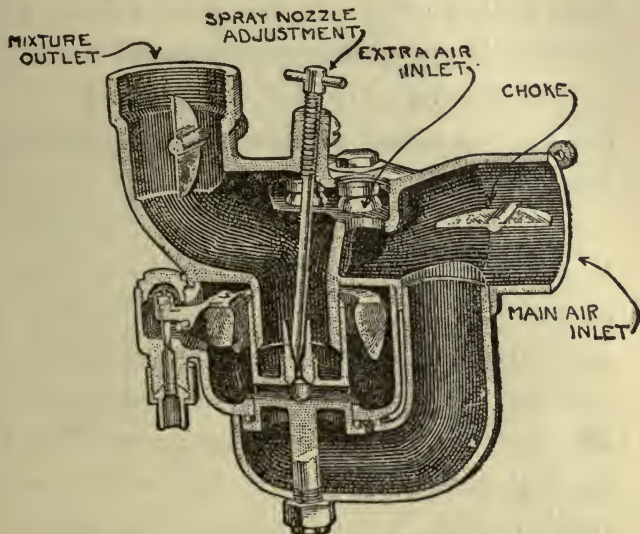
“KINGSTON” CARBURETOR, MODEL E
